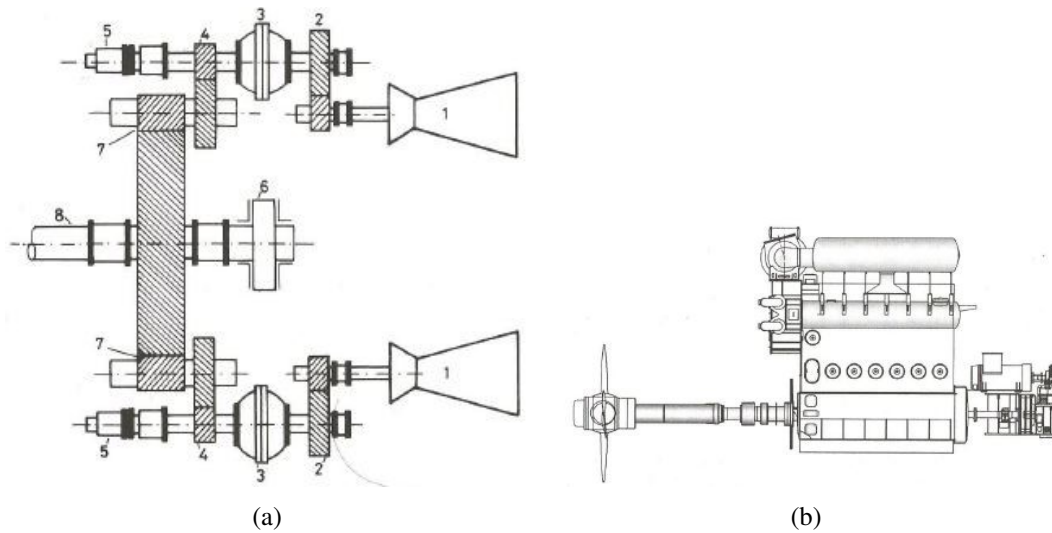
Three-stage reduction gearbox currently installed onboard the aircraft carrier Garibaldi of the Italian Navy (a) [6]. LM2500 gas turbine (1), first stage reduction gearbox (2), reversing clutch (3), second stage reduction gearbox (4), synchro-self-shifting clutch (5), thrust bearing (6), third stage reduction gearbox (7), propeller shaft (8). Schematic view of mechanical propulsion plant based on reciprocating engine directly coupled with the propeller (b).
